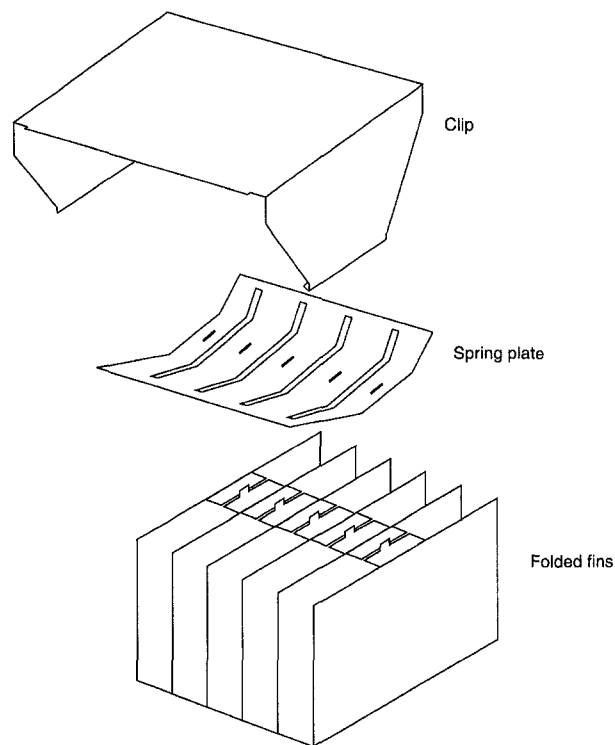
Exploded view of the spring-loaded, folded-fin heat sink (Mok, 1994)
